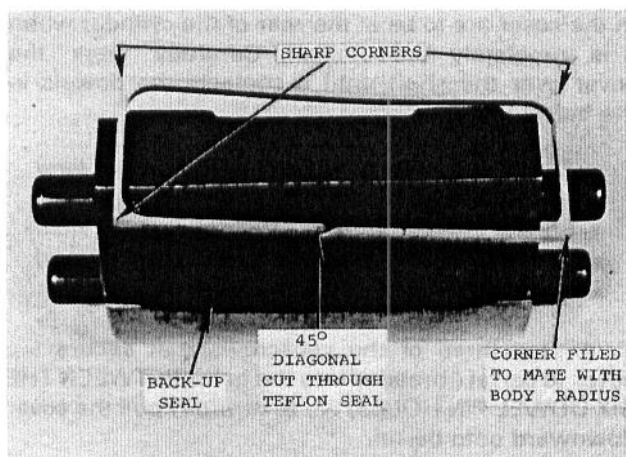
Shaping Teflon Seal for Barrel Vane
